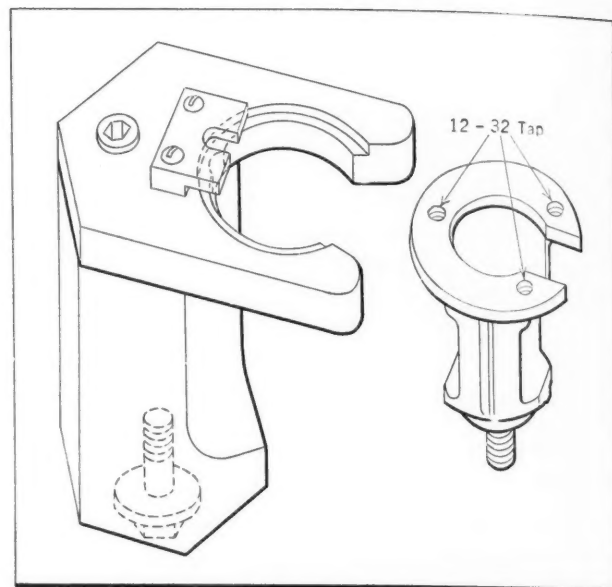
Simple Fixture Used for Tapping Three Evenly Spaced Holes
